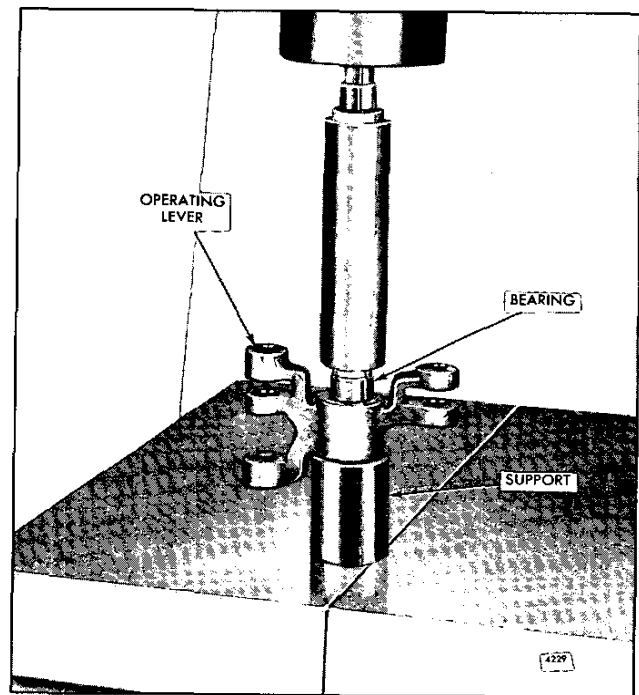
Installing Control Link Operating Lever Bearings in Lever Using Tool J 21068
